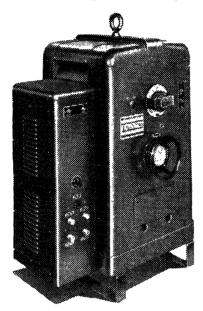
An A.C. transformer type arc welder specially designed for inert gas arc welding. This machine has a high frequency arc stabilizer, also automatic water and gas valves
